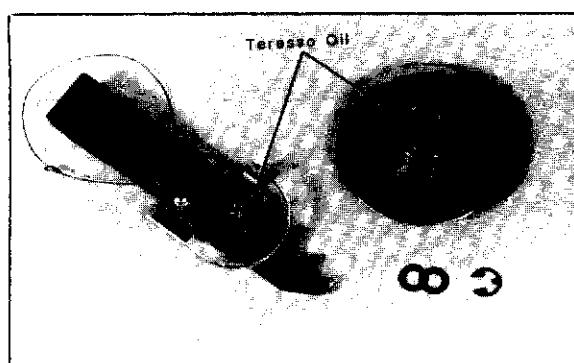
CLEAN and SERVICE CLUTCH ARM
